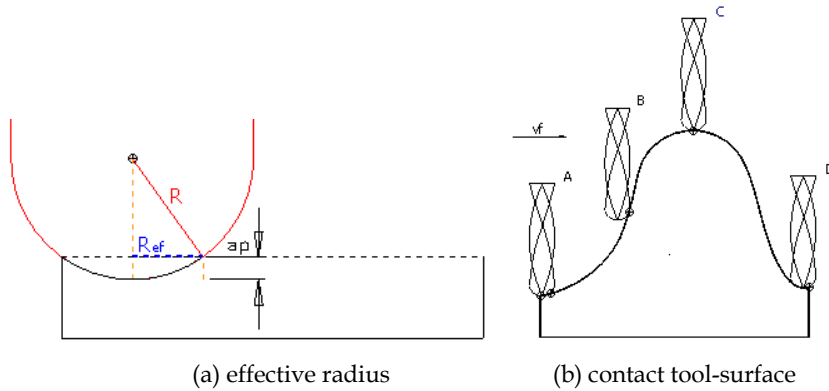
Effective tool diameter and contact tool-surface in free form milling
